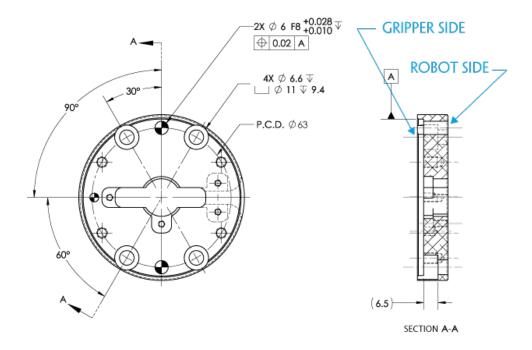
Coupling for PCD 63 mm with 6 x M6 clearance.
